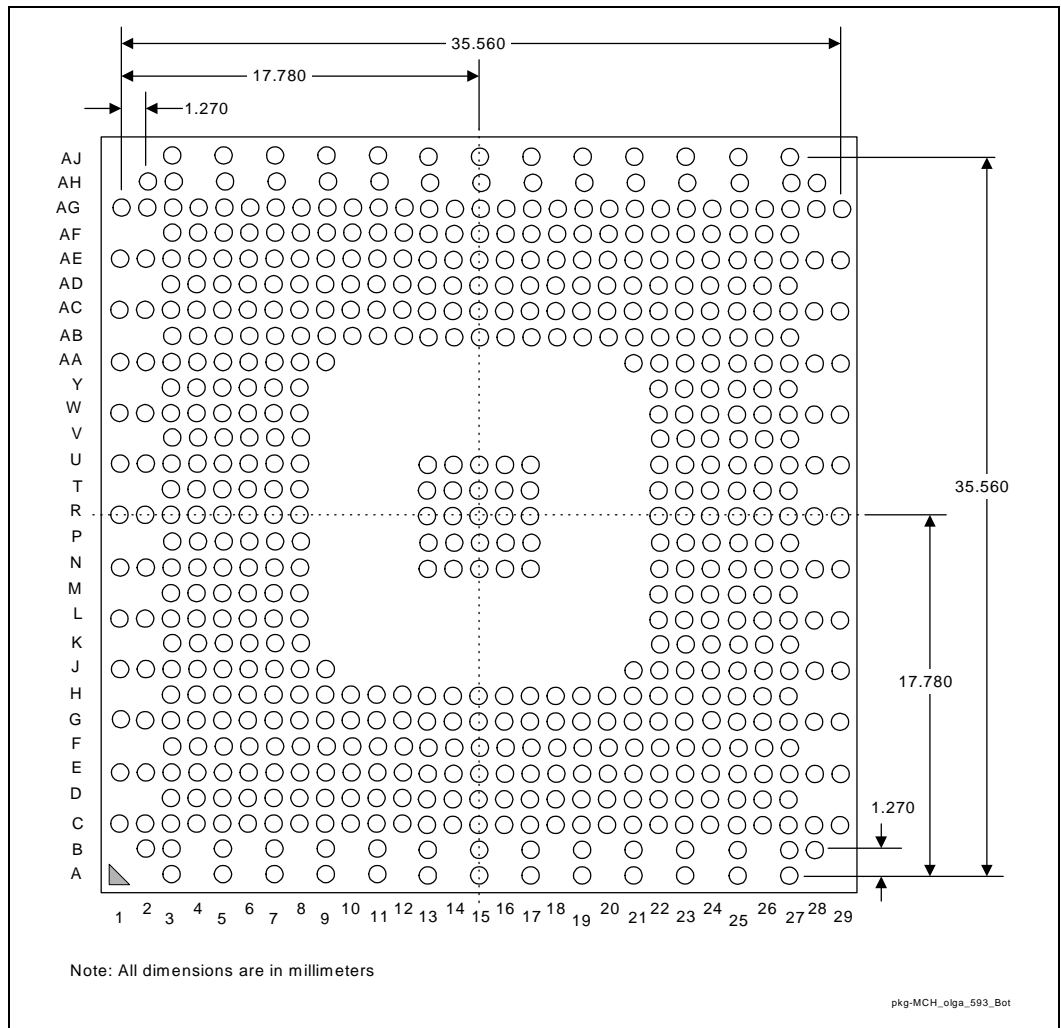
Intel® 82845 MCH FC-BGA Package Dimensions (Bottom View)
